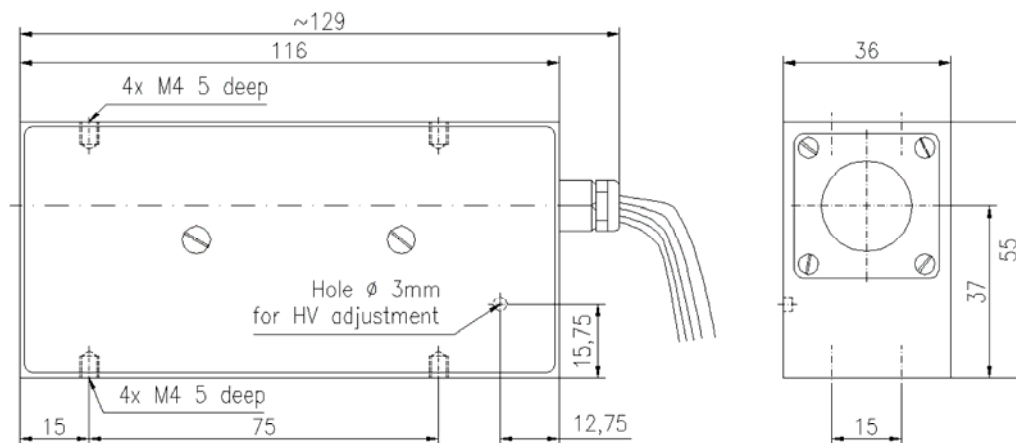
Dimensions of PerkinElmer, MH1943 photomultiplier module in mm.
